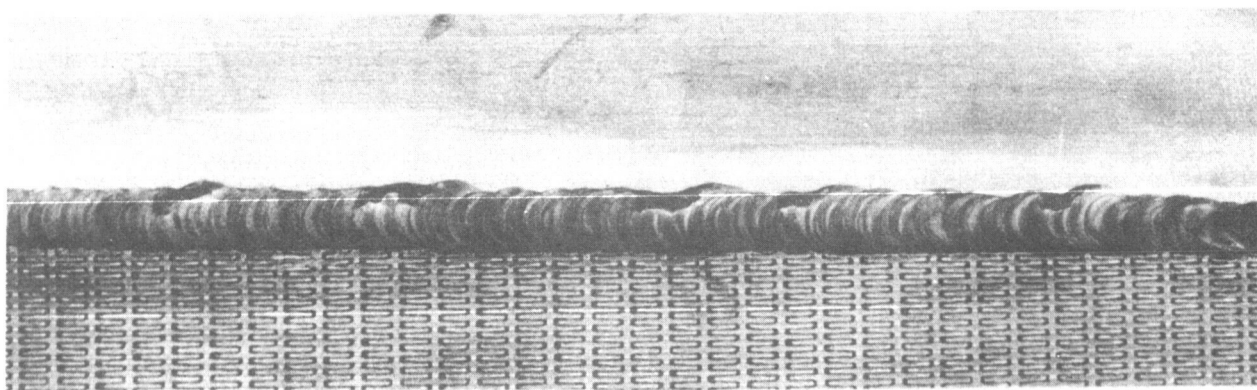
Butt Welded (TIG) Woof to Sheet 1.6X
